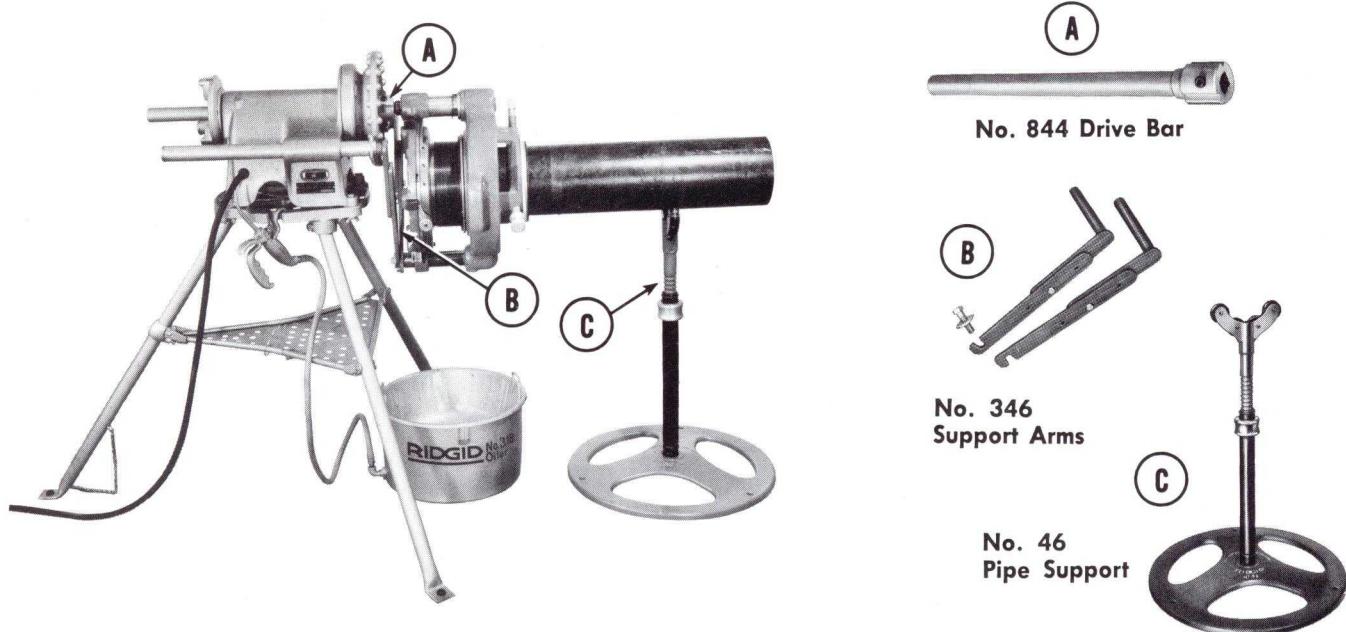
With No. 161 Threader and 300, 400, 400A or 200 Power Drives, use equipment shown below.
